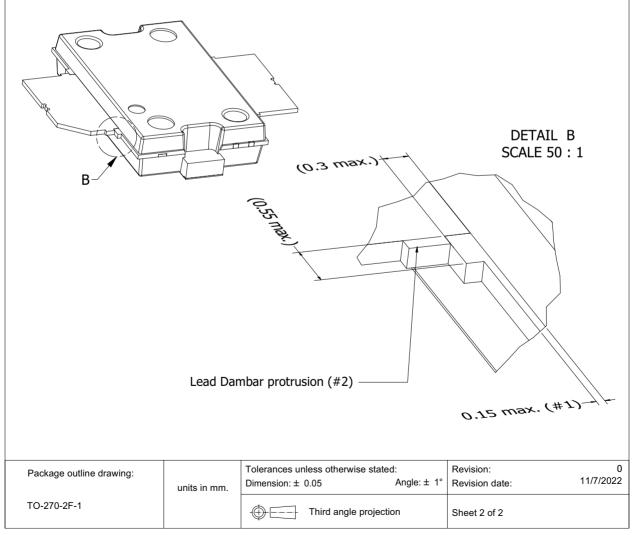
Package outline TO-270-2F-1 (sheet 2 of 2)
